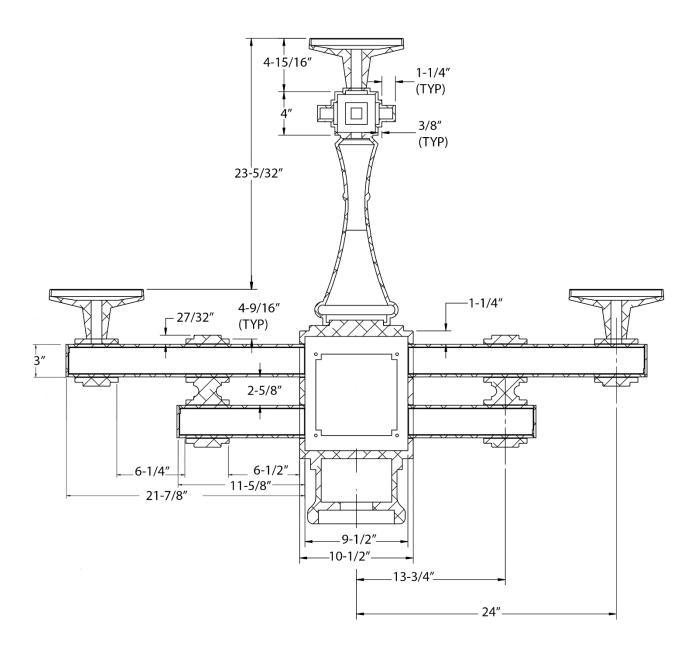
Three-Ball Globe Assembly Component Diagram
